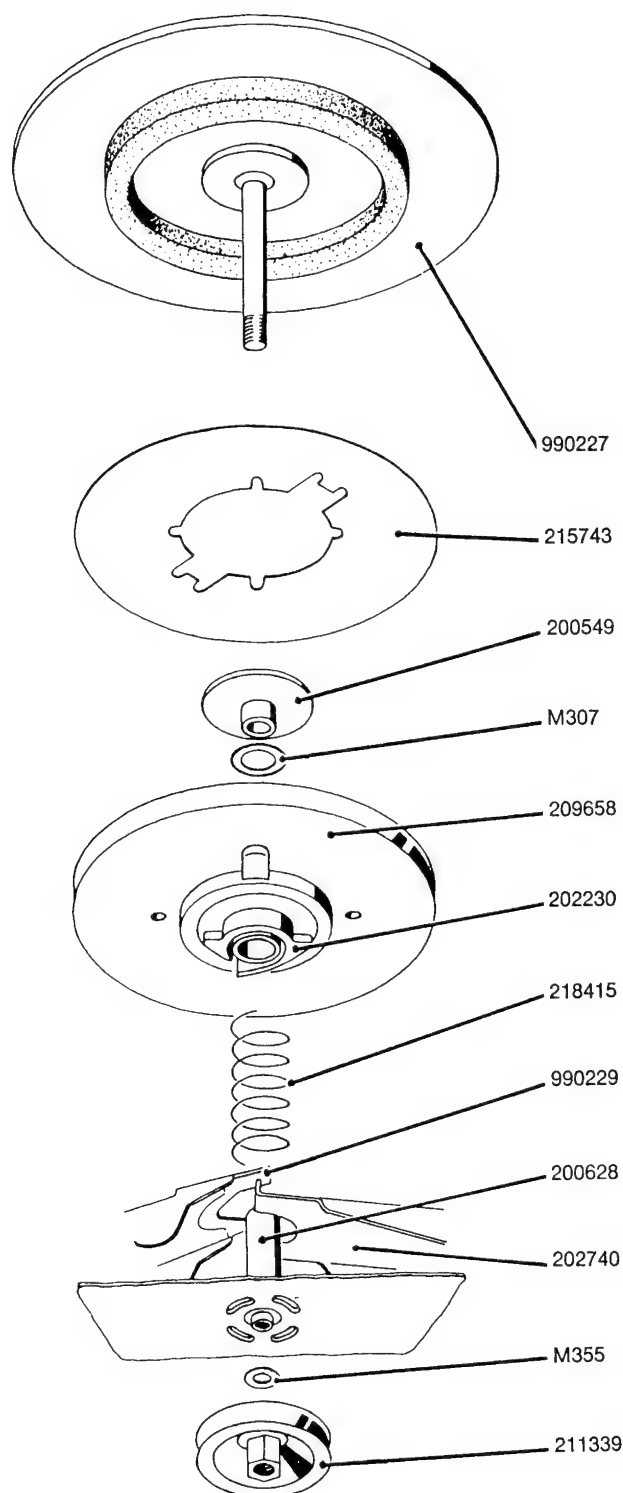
Take-up turntable assembly, Series 14/15.
